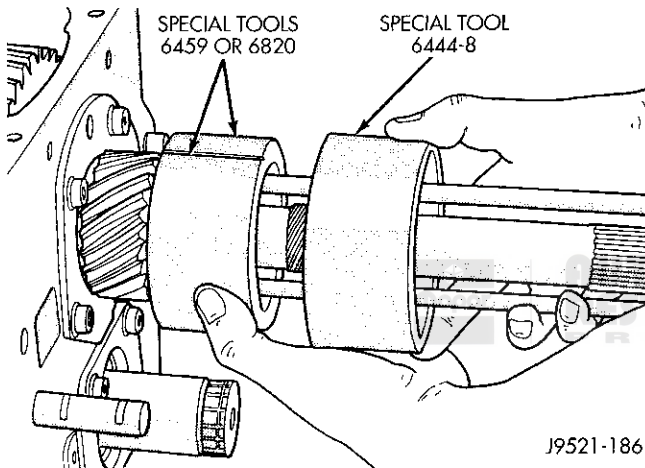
Installing First Puller Jaw On Mainshaft Fifth (Overdrive) Gear
